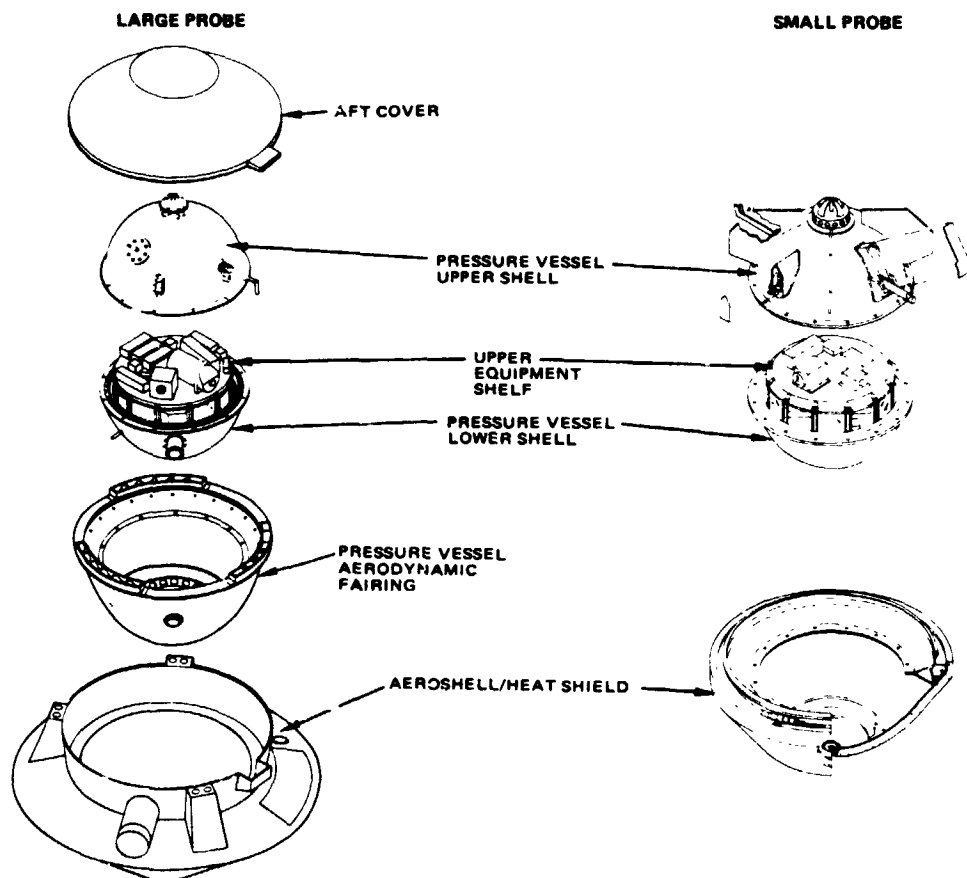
Exploded Views of Pioneer Venus Large and Small Probes
